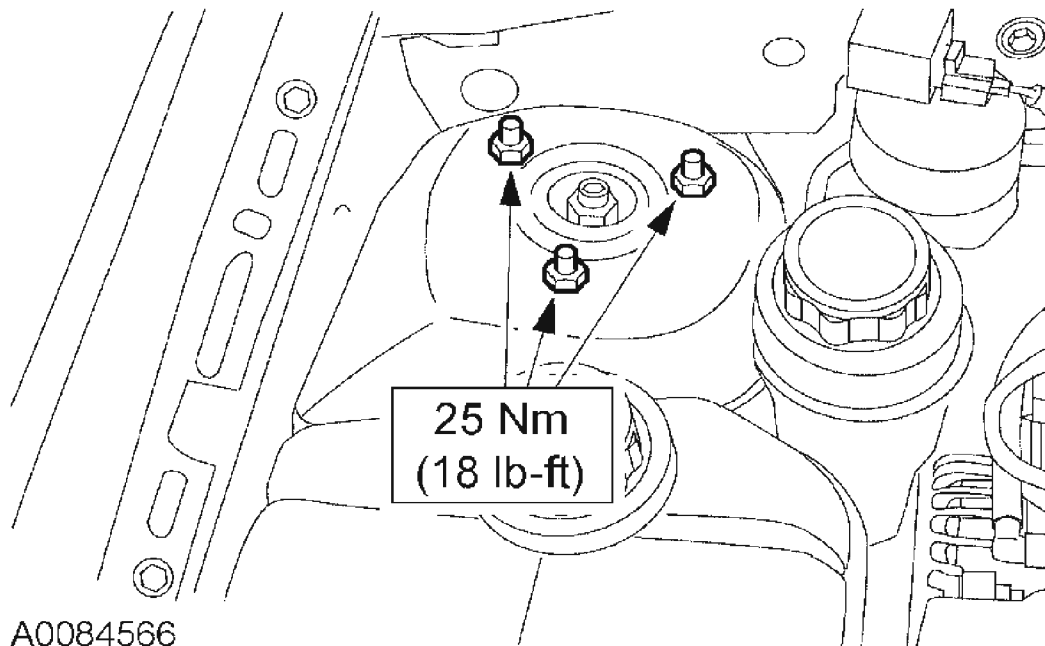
Tightening Wheel And Tire Strut And Spring Assembly
